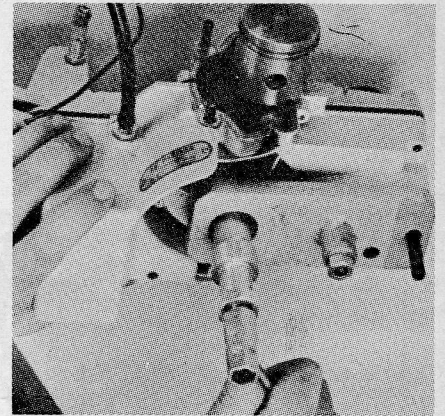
Use Partner tool number 381 912 as shown to separate crankcase. Same tool is used when crankcase is being joined.
